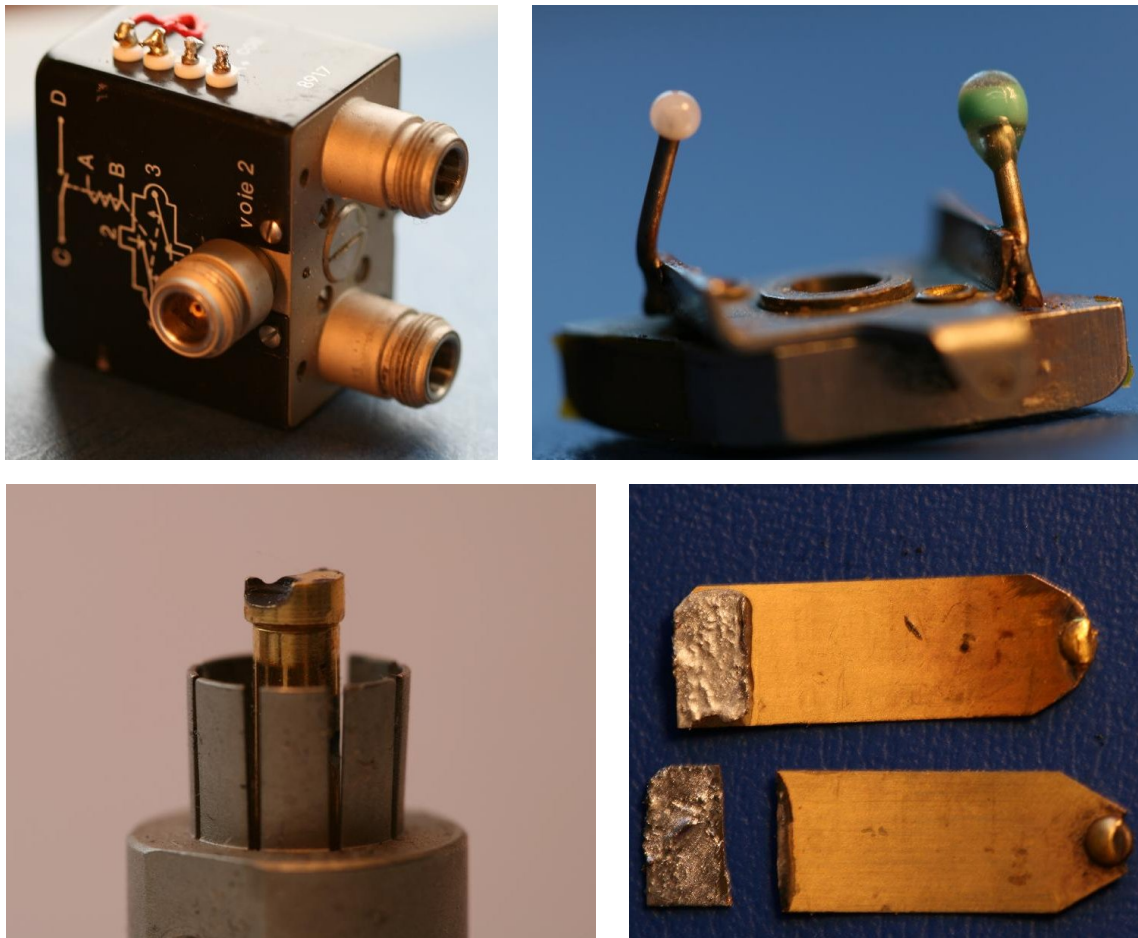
(top left) A complete relay unit; (top-right) the rotor mechanism; (bottom-left) an RF cable connector contact pin which has suffered from severe contact erosion; (bottom-right) an intact and a snapped contact blade.
